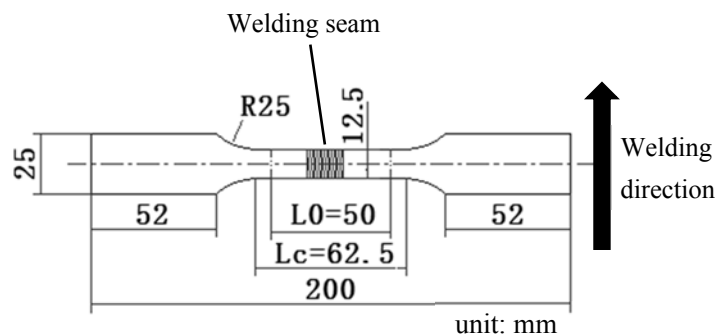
13 Tensile specimen dimensions for FSW butt welds
